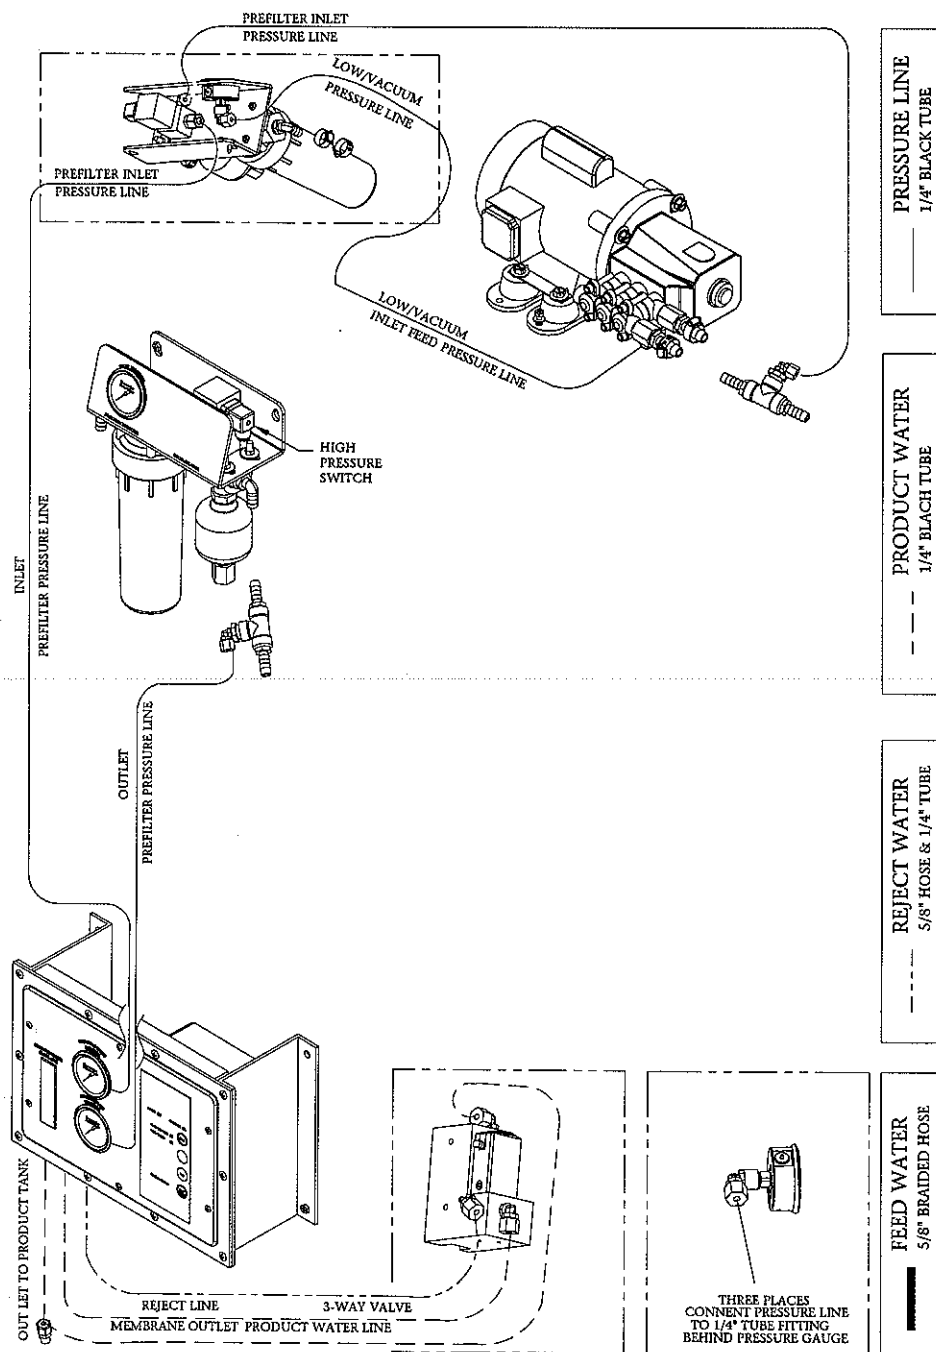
Illustration of the 1/4" black tube connections to sub-assemblies on a Modular System.
